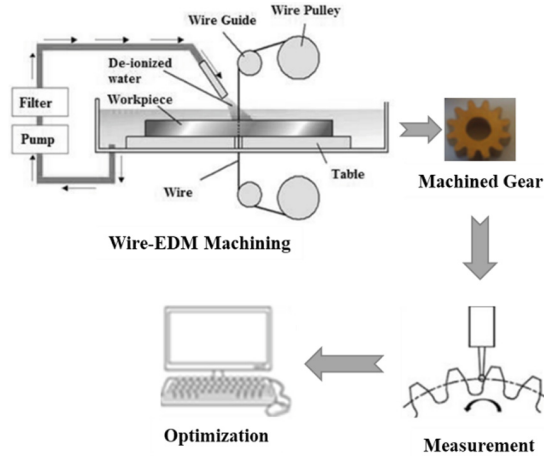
Sequence of tasks in wire-EDM gear manufacturing.
